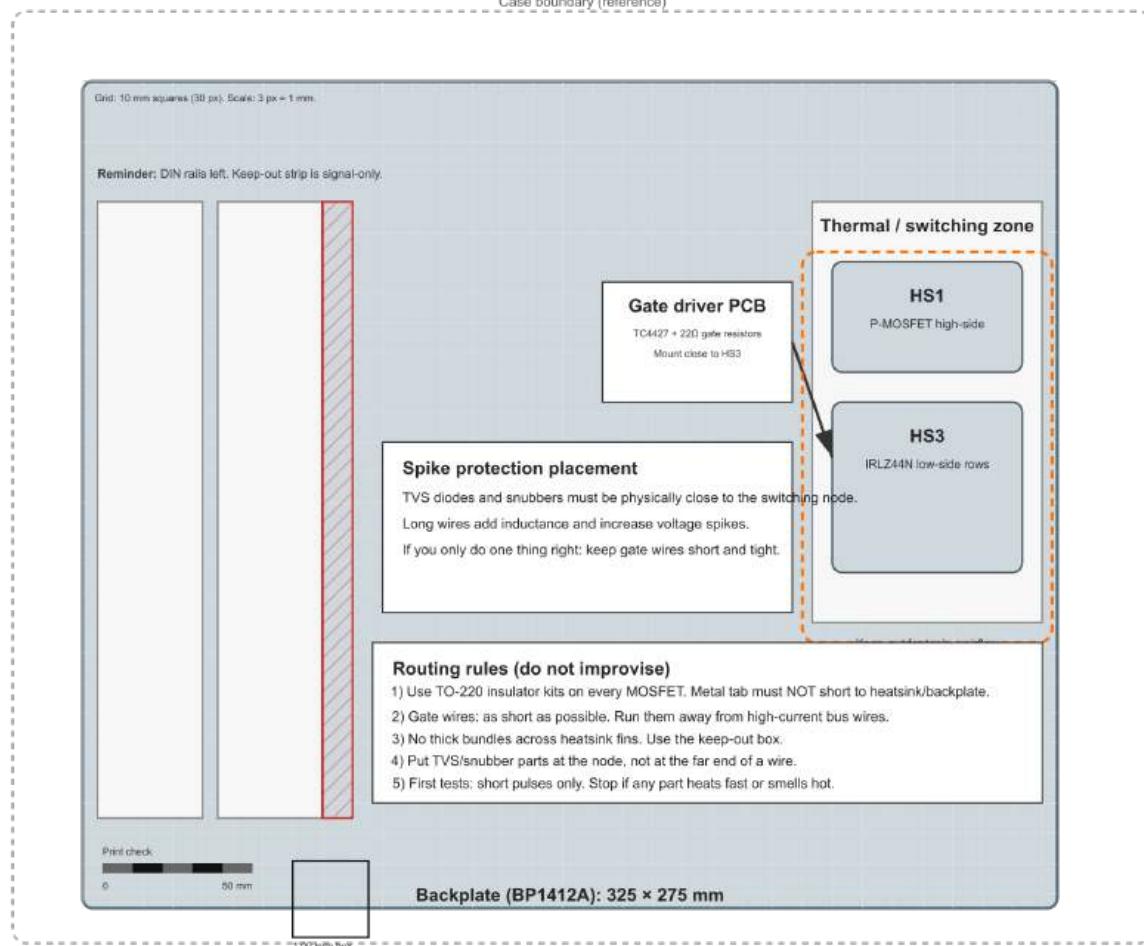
Switching and Thermal Layout (Sheet 03)
